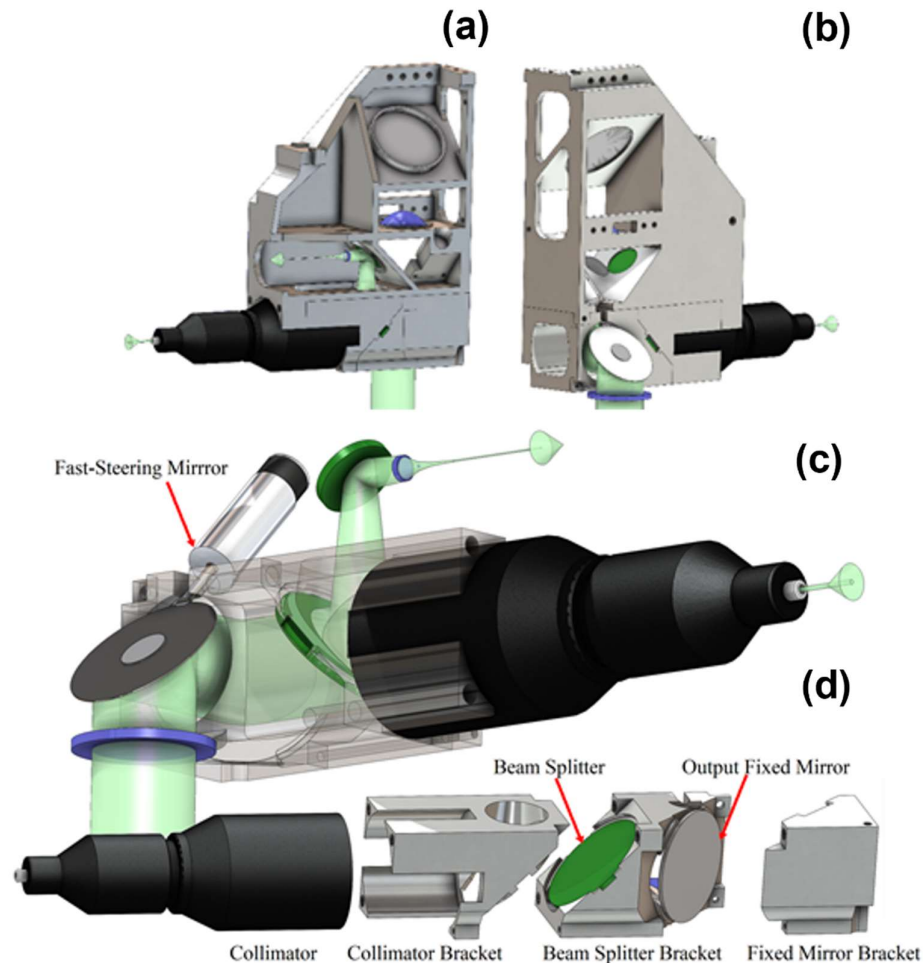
Optical transmitter assembly (a) front view, (b) rearview. (c) Beam path in the transmitter branch. (d) Exploded view of the transmitter branch brackets.
